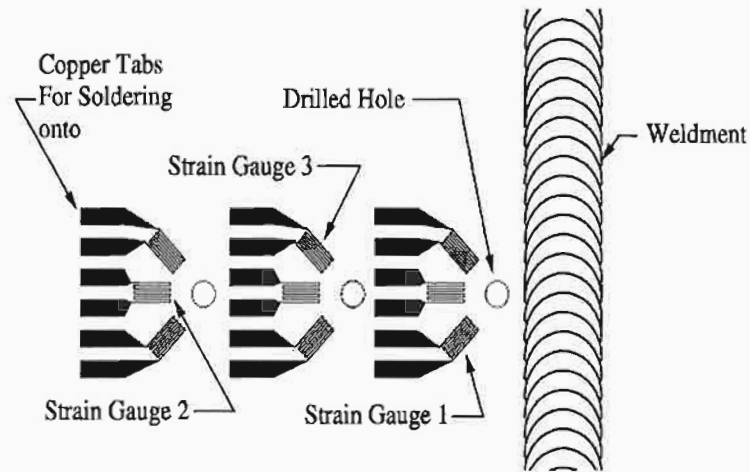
CEA-XX-062UM-120 Rosettes that were used for residual stress measurement, were aligned with strain gauge 2 perpendicular to the direction of the weld.
